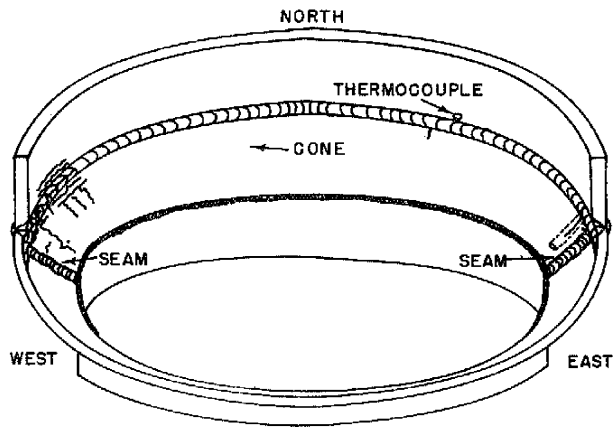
Sketch illustrating cracking in nitric acid converter cone section made of Type 405 stainless steel.
